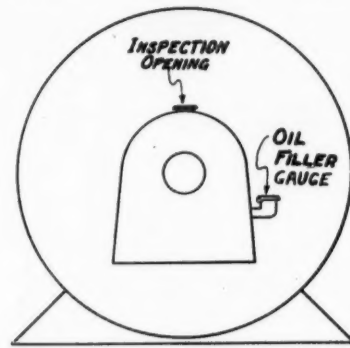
1 hp. and larger motors must usually be oiled by the installer. Note location of gauge and inspection opening.
